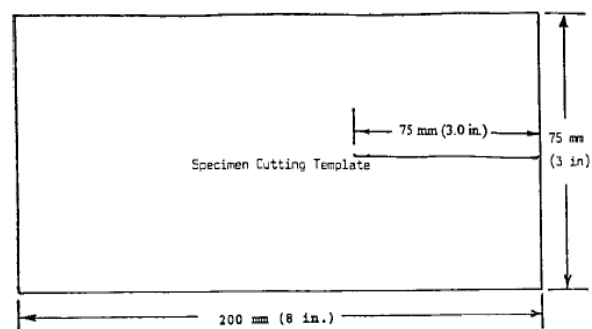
Template for Marking and Cutting Tongue Tear Specimens, All Tolerances $\pm 0.5\%$
